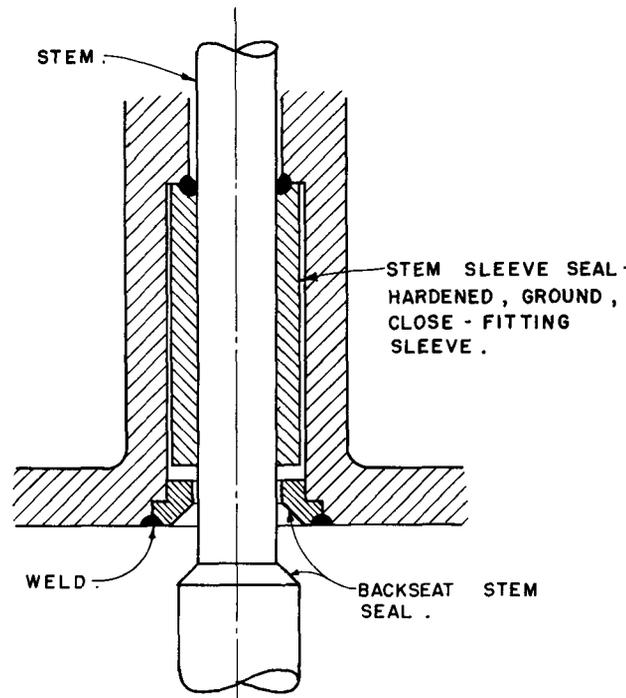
Sleeve Stem Seal and Backseat Stem Seal.
